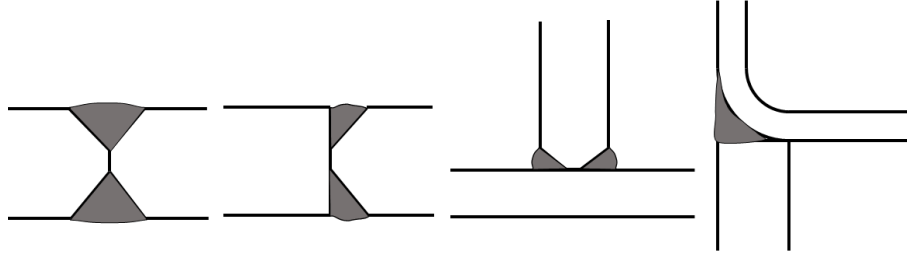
Different types of PJP weld connections. From left to right, a double-bevel PJP butt groove weld, a single-bevel PJP butt groove weld, a T-type PJP groove weld, and a flare-bevel groove weld.
